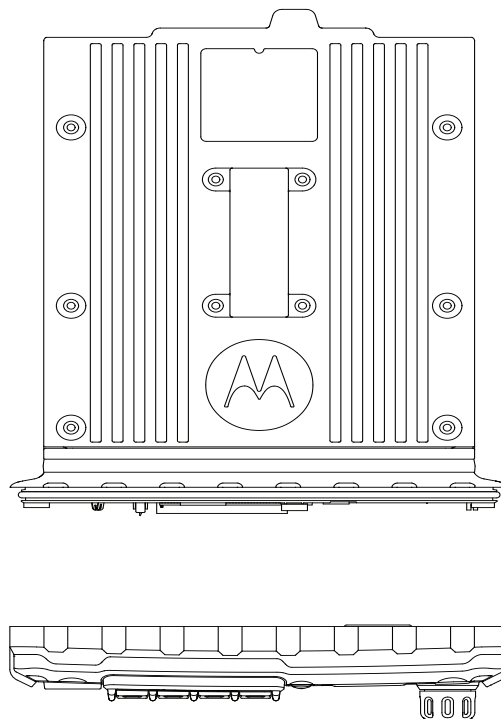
Attaching the Front Housing Assembly to the Back Housing Assembly
